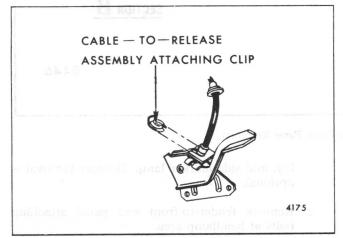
Hood Latch Cable-to-Release Handle Attachment - "H" Body (Less "07,27" Styles)
